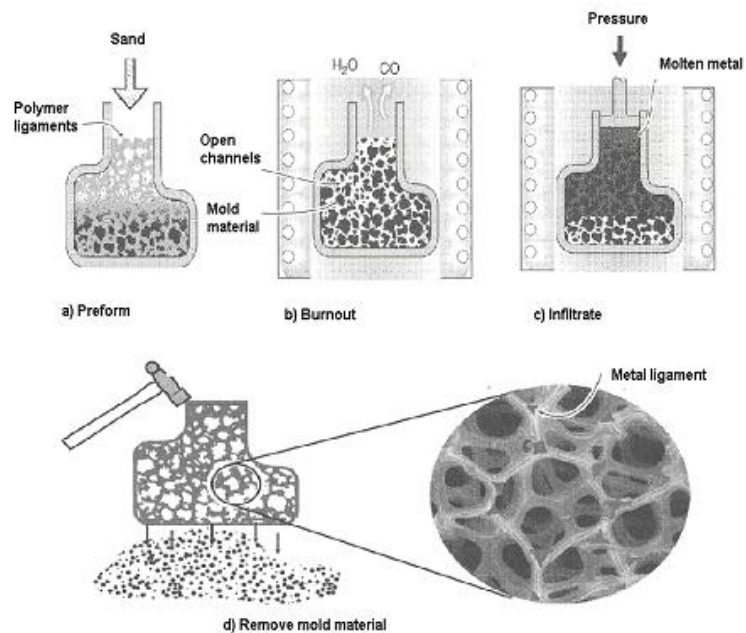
Investment casting method used to make open cell metal foams [3].
